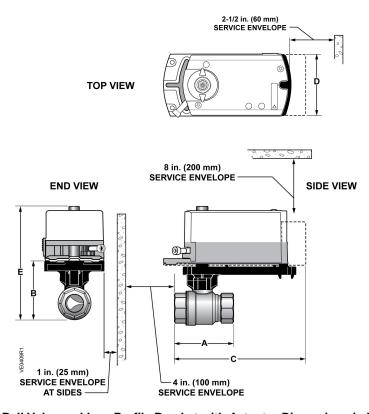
Two-Way Ball Valve and Low Profile Bracket with Actuator Dimensions in Inches (Millimeters).
